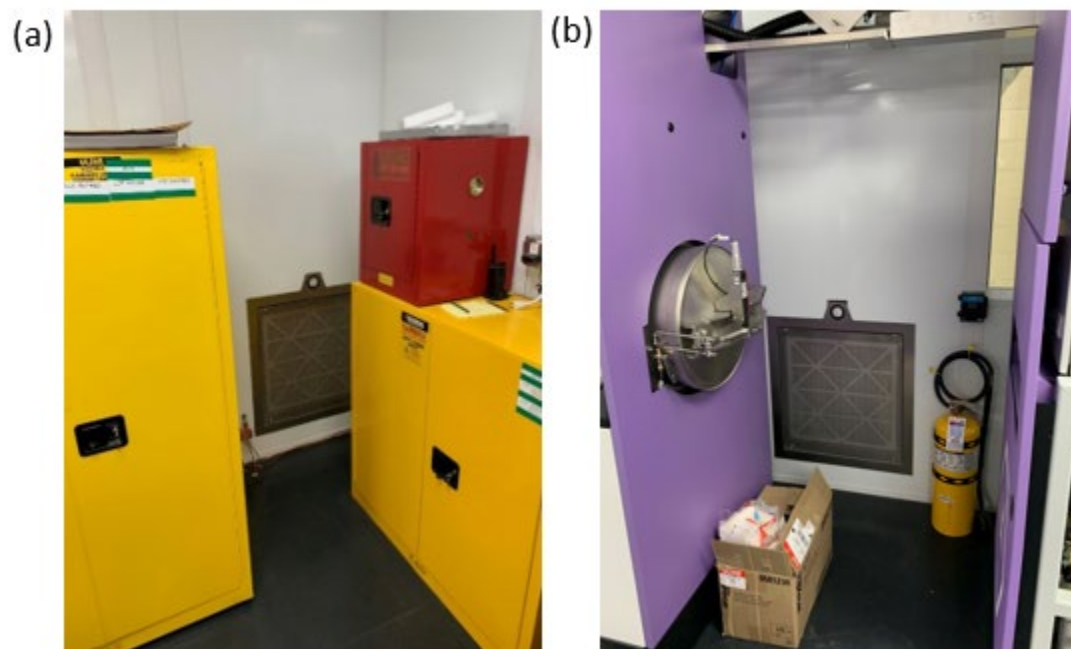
Photos showing examples of equipment near exhaust vents in the powder bed fusion room: (a) cabinets, (b) printers.
